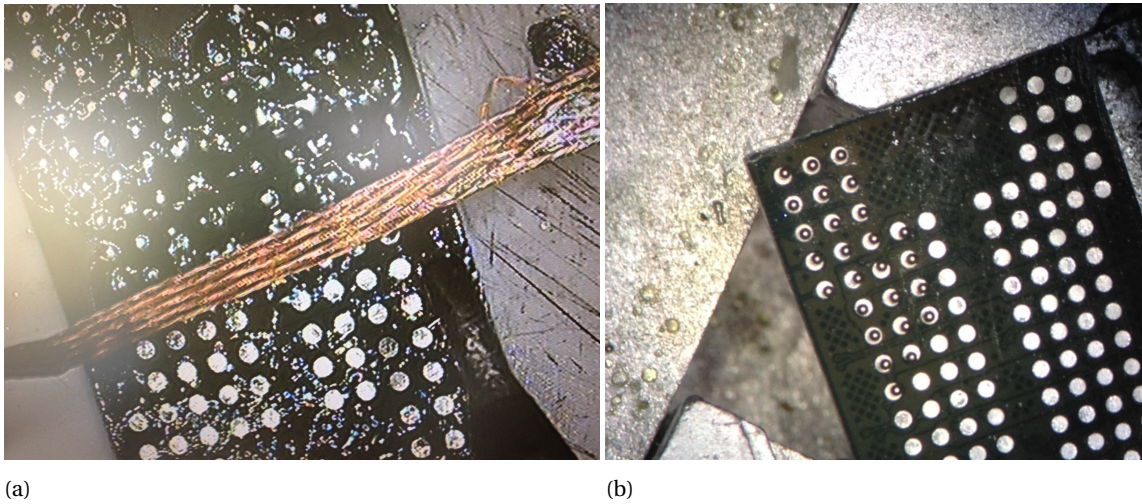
A (digital) microscope is a necessary tool when working with fingernail-sized packages. (a) Removing leftover solder from the chip using desoldering braid and a soldering iron. (b) 0.25 mm diameter solder balls are placed on each of the 132 pads.
